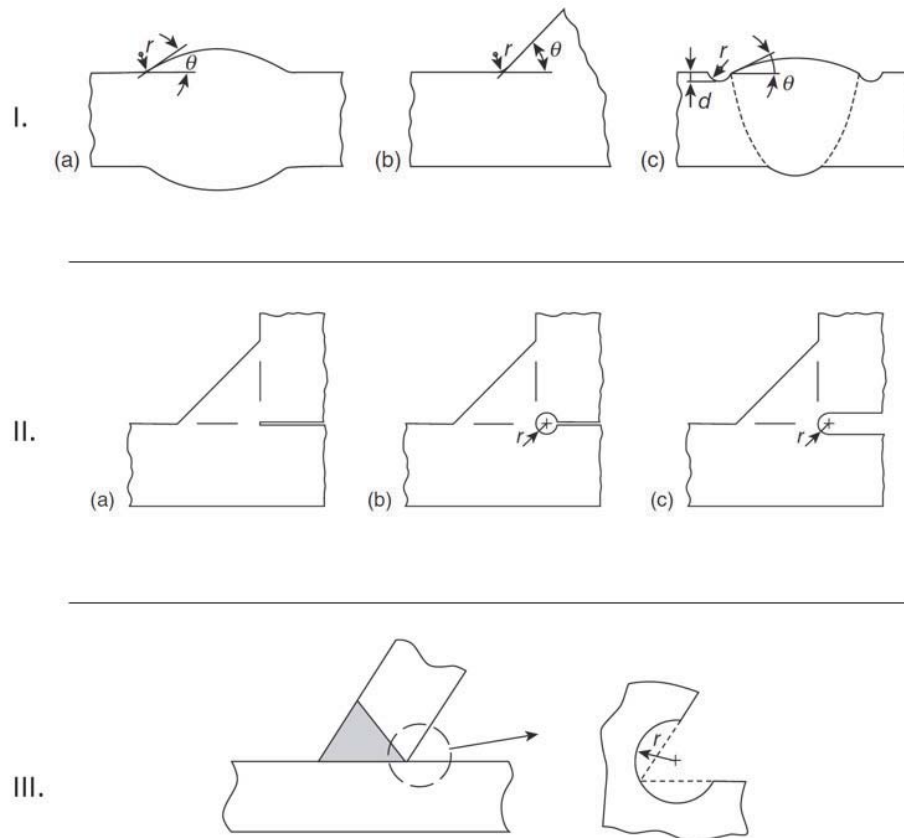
Modelling of the idealized weld profile. I. Rounding of weld toes of (a) a butt-weld, (b) a fillet weld and (c) a butt weld with undercuts. II. Rounding of the weld root of a non-penetrating fillet weld (a) by a keyhole (b) and U-shaped notch(c). III. Notch rounding of the weld root of a Y-joint [3].
